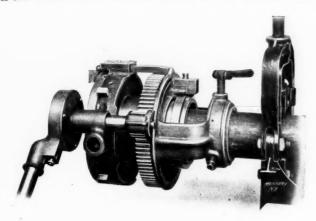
Buckeye Die-stock for Cutting Taper Pipe Threads up to 4 Inches in Diameter.
